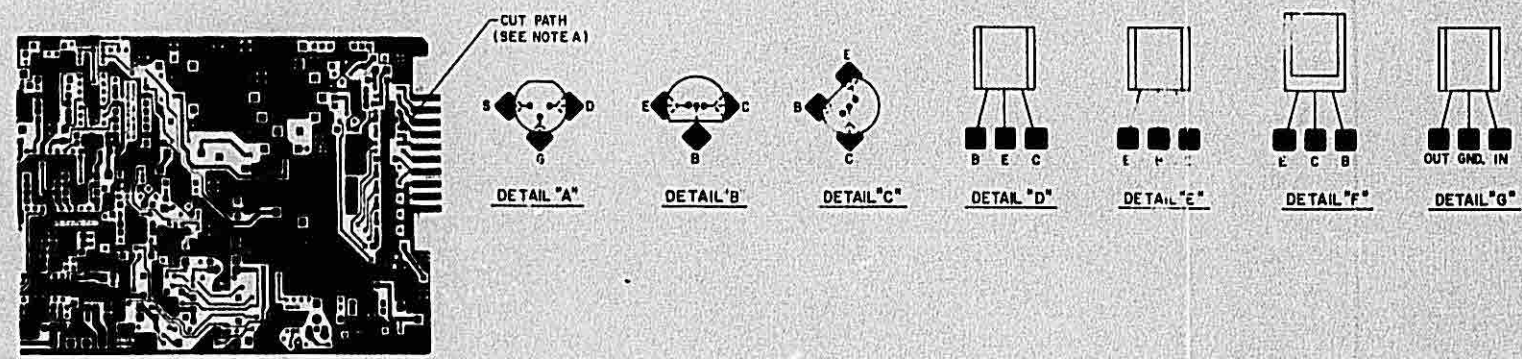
KY 197/197E MAIN BOARD ASSEMBLY
